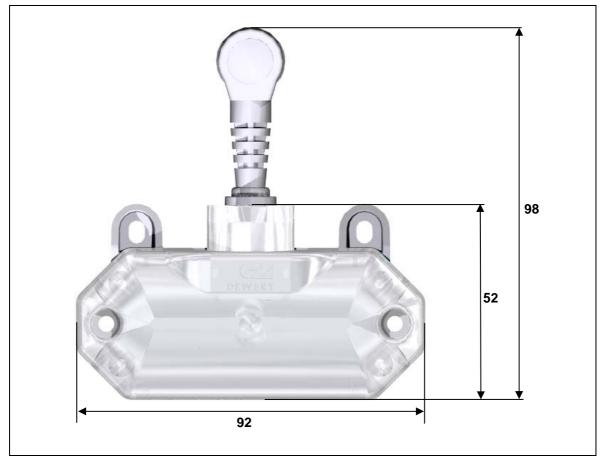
Dimensions of floor lighting, for attachment to double drive (in mm)
